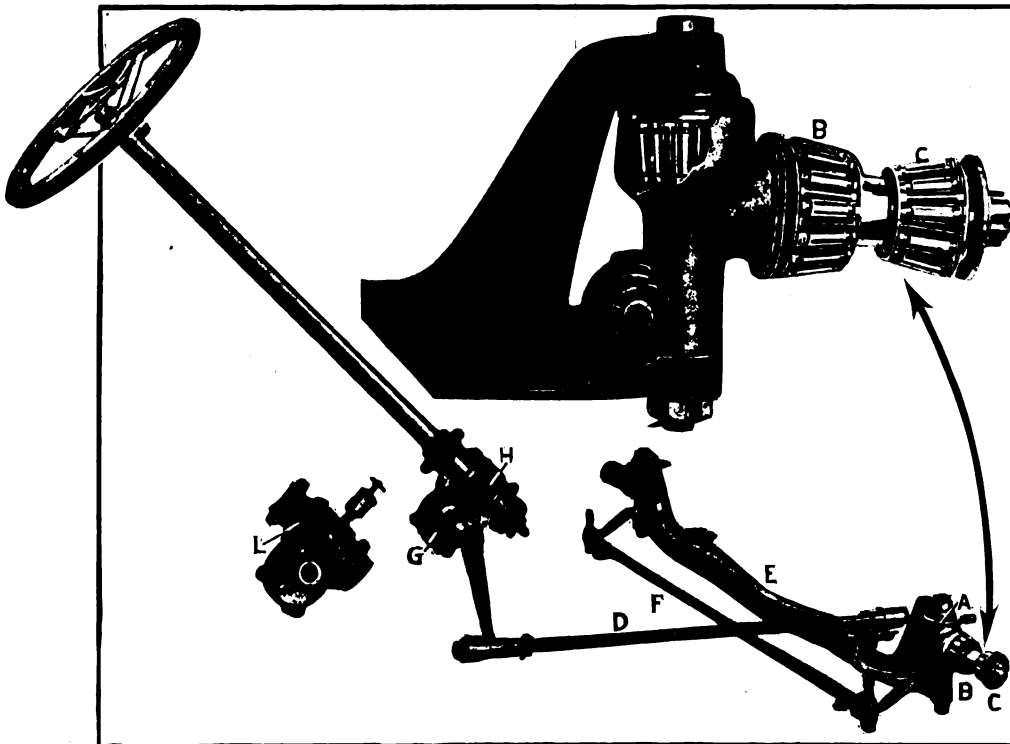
View of front axle and steering gear with an enlargement of the knuckle
